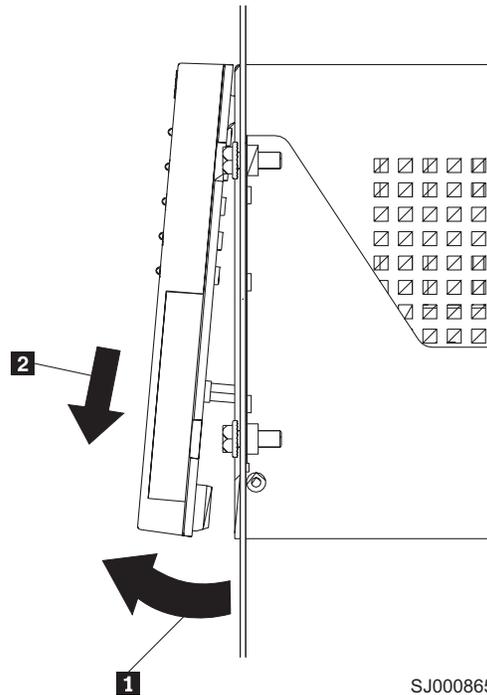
Removing the controller unit bezel (machine types 3552 and 1742)
